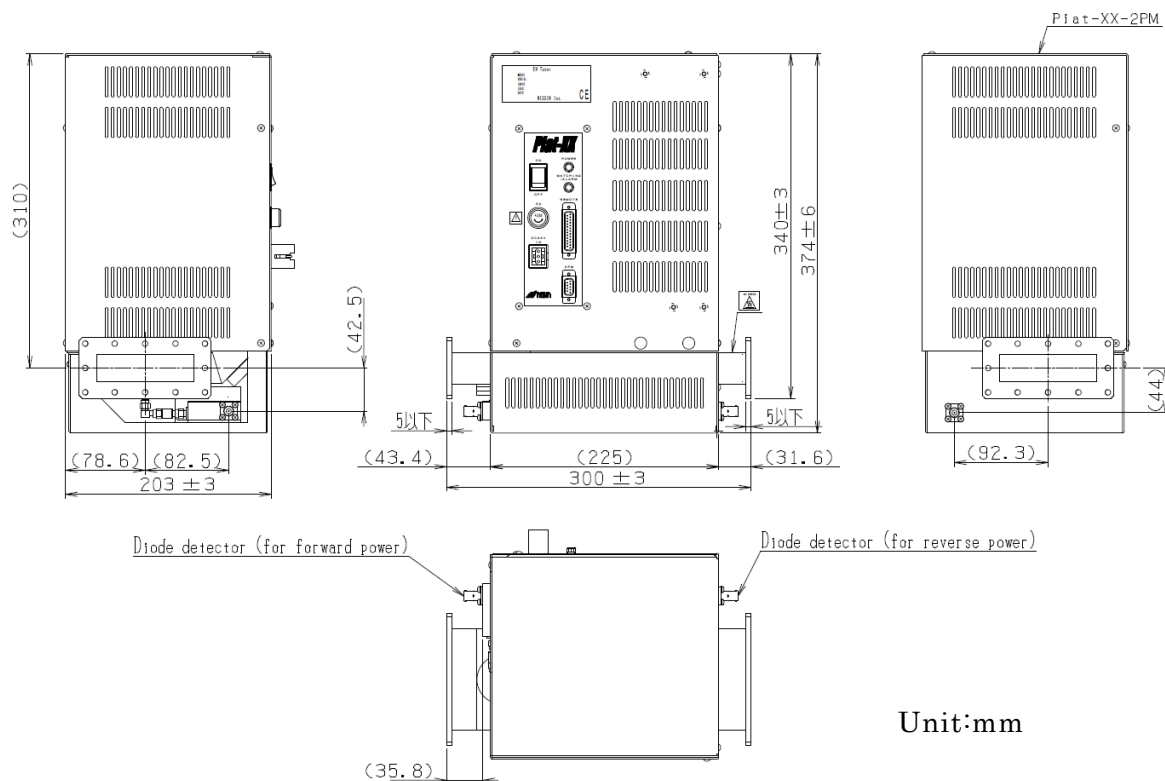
Piat-XX-2PM-CE Outline dimensional drawing
